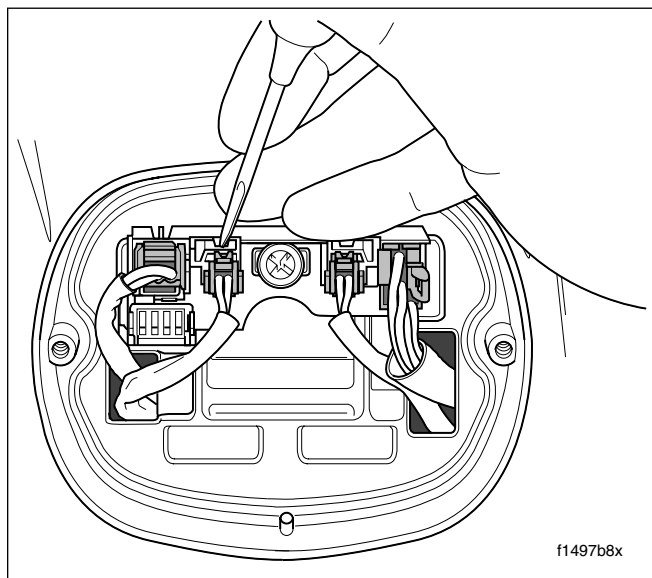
Use Pick Tool to Release Left Turn Signal Lamp Socket
